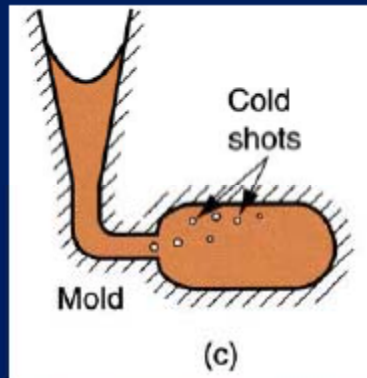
Some common defects in castings: (c) cold shot
